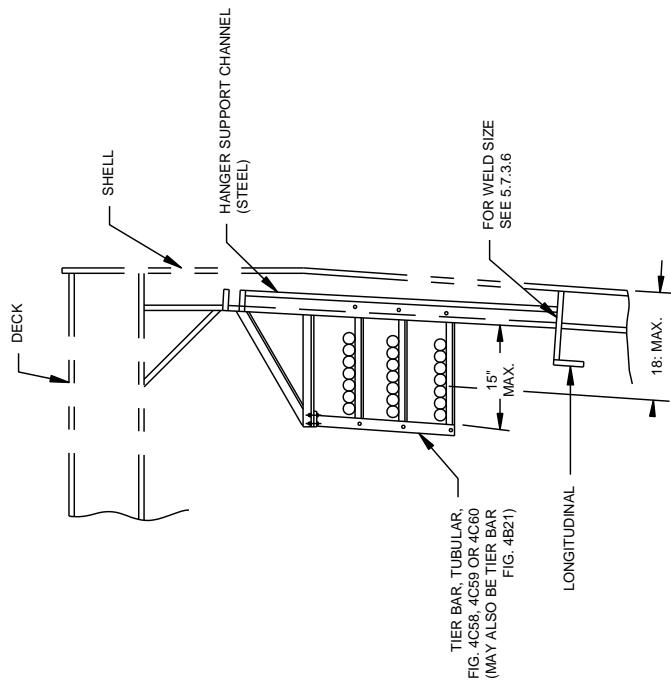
B74. Cable support for degaussing cables (surface ships) – section views.
